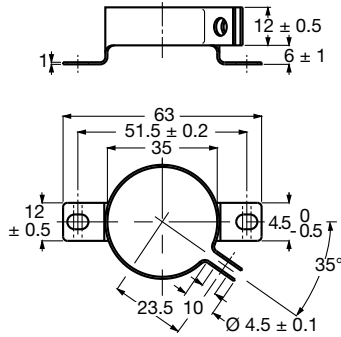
Dimensional outline of clamp for case Ø D = 35 mm
